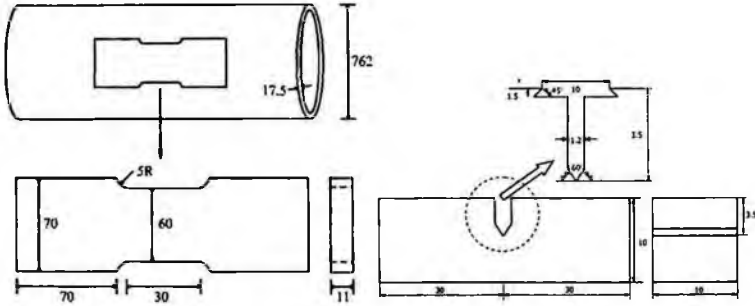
Plate-type tensile specimen for pre-strain and 3-point bend specimen for the CTOD test.
